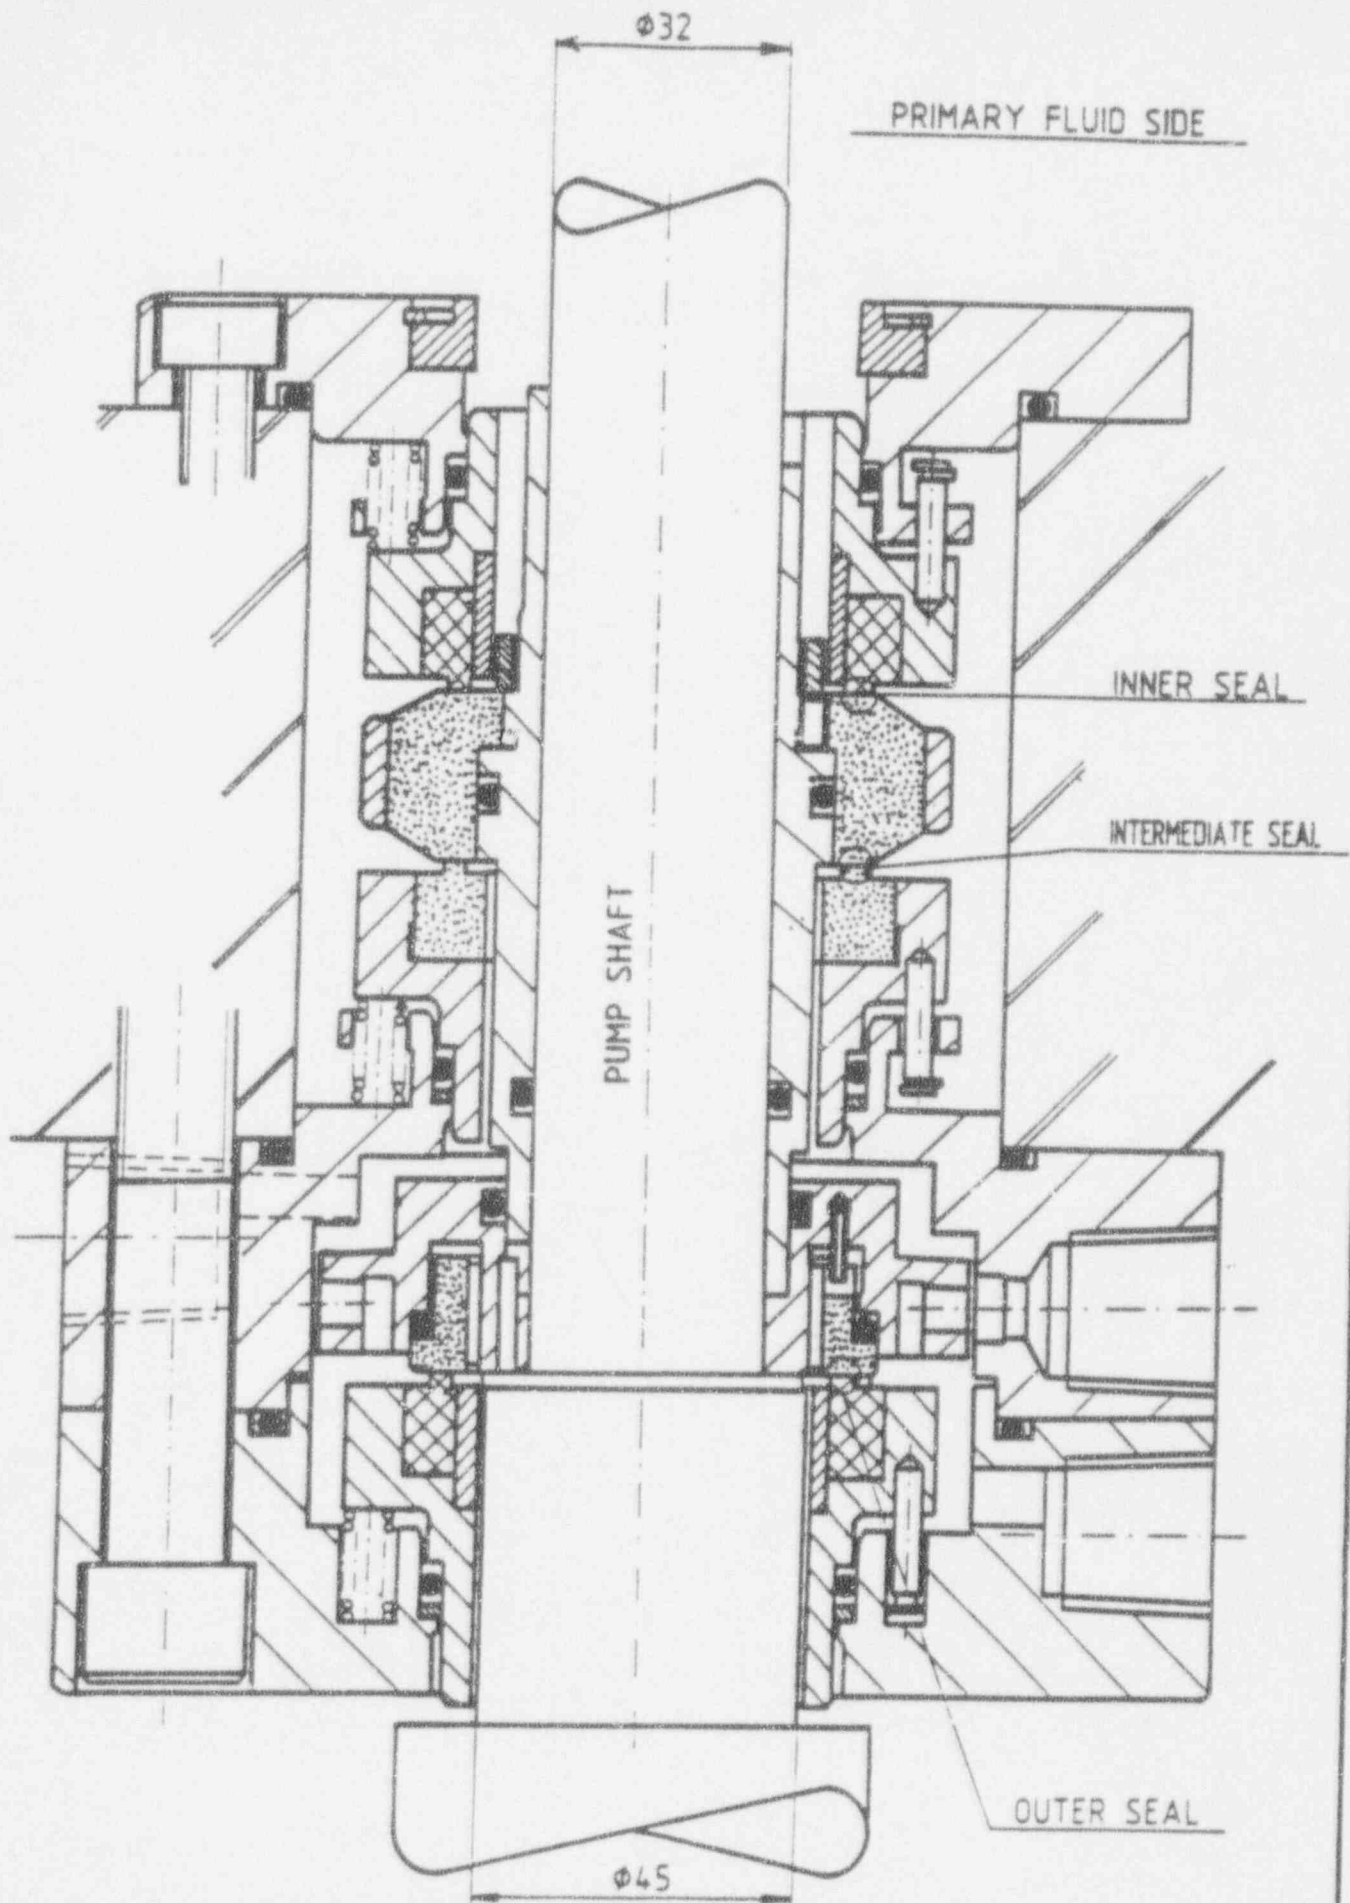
/4 - Primary pump mechanical seal arrangement
